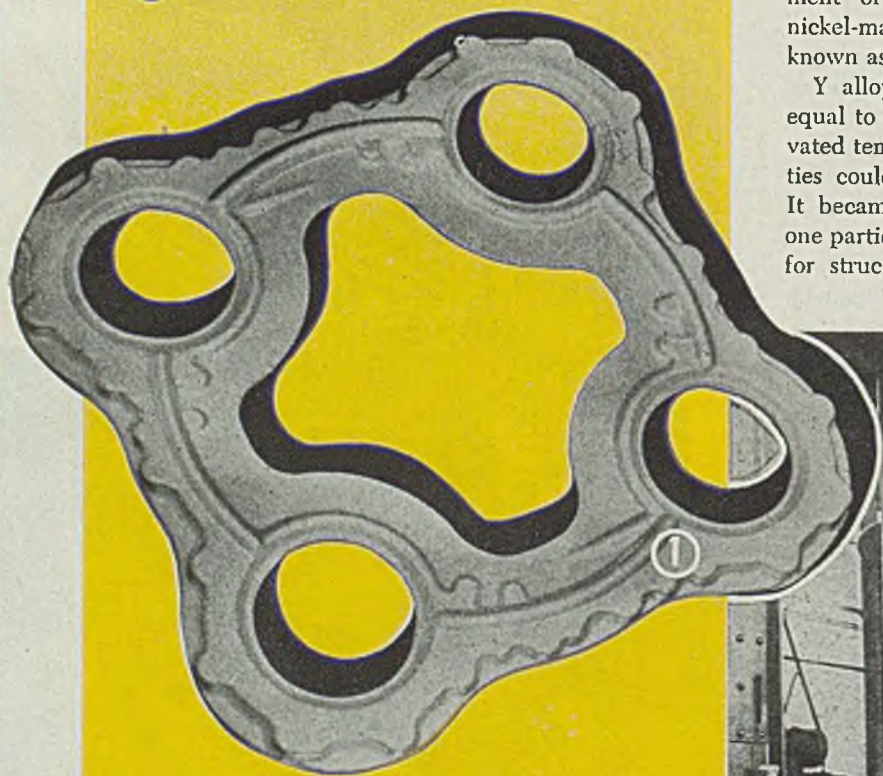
Reduction-gear carrier plate stamping in Hilduminum RR 56
